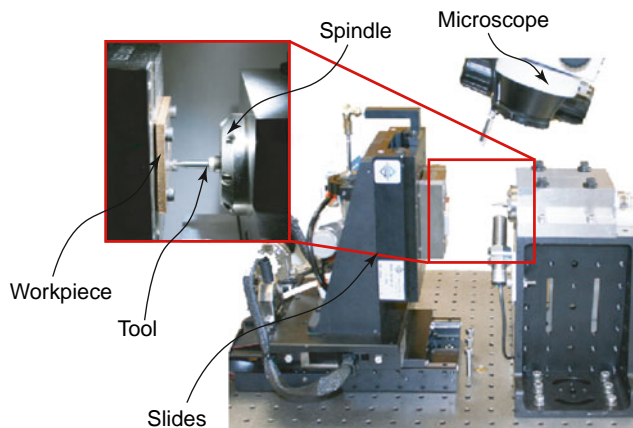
The custom-built high-precision miniature machine tool system used for fabrication of master molds.
